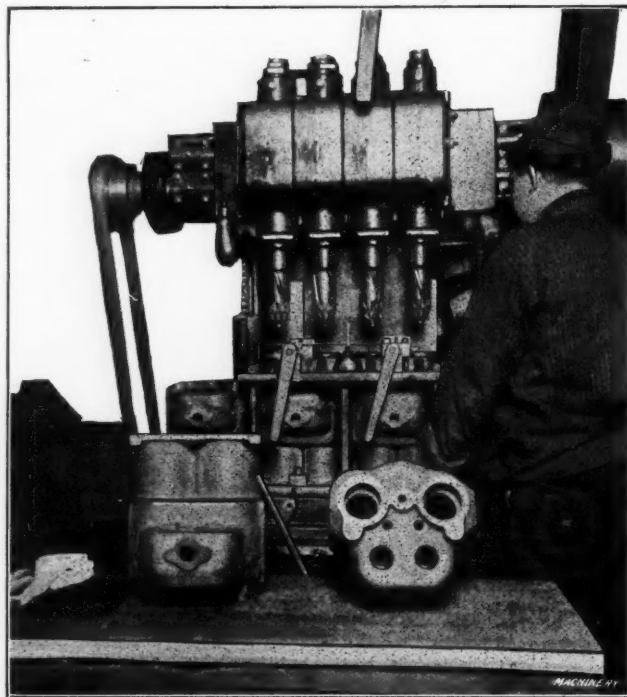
Rough- and finish-boring the Inlet Valve Chamber Seats on a Moline Adjustable Spindle Drilling Machine
